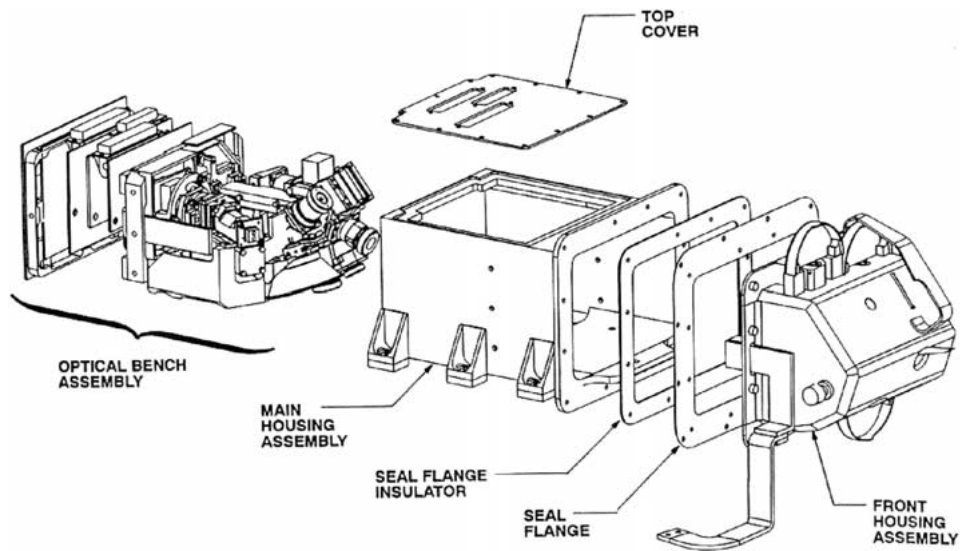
The optical bench assembly and how it fits into the sensor head package.
